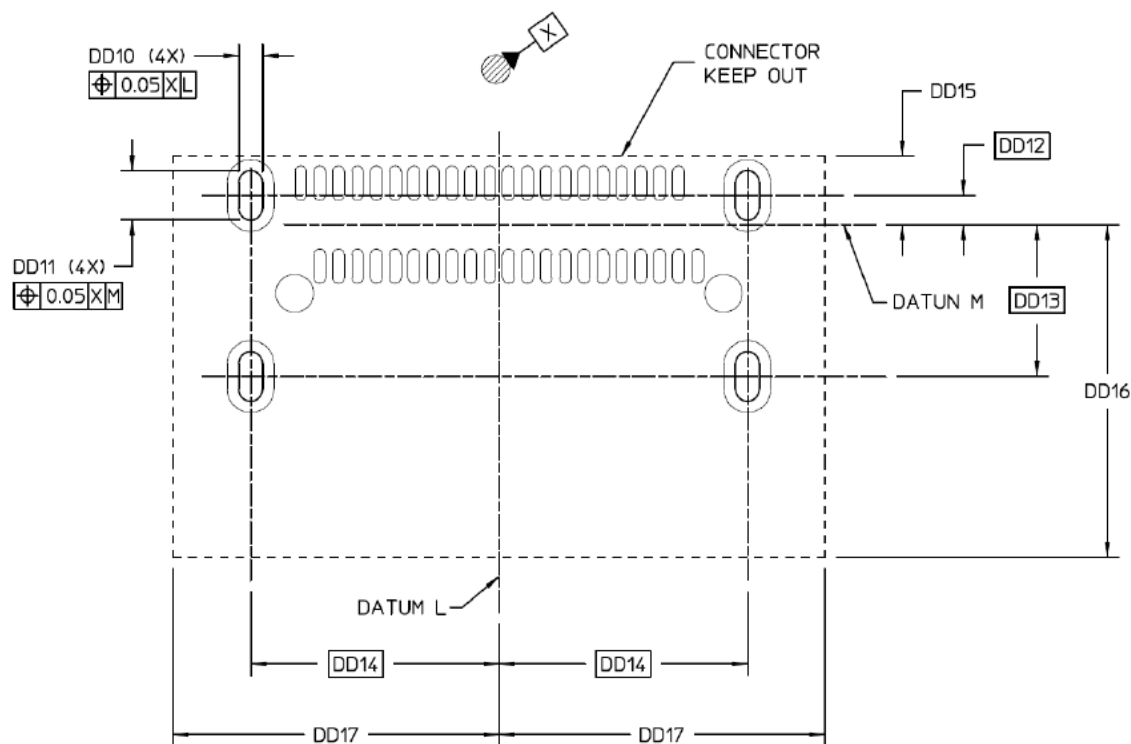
Example Through-Hole Footprint for Right-angle Connectors
